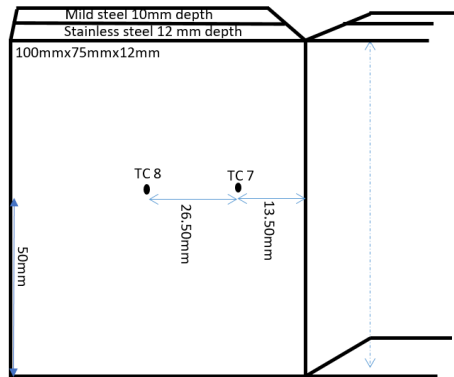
Bottom view of weld plan and thermocouple positions TC7 & TC8.
